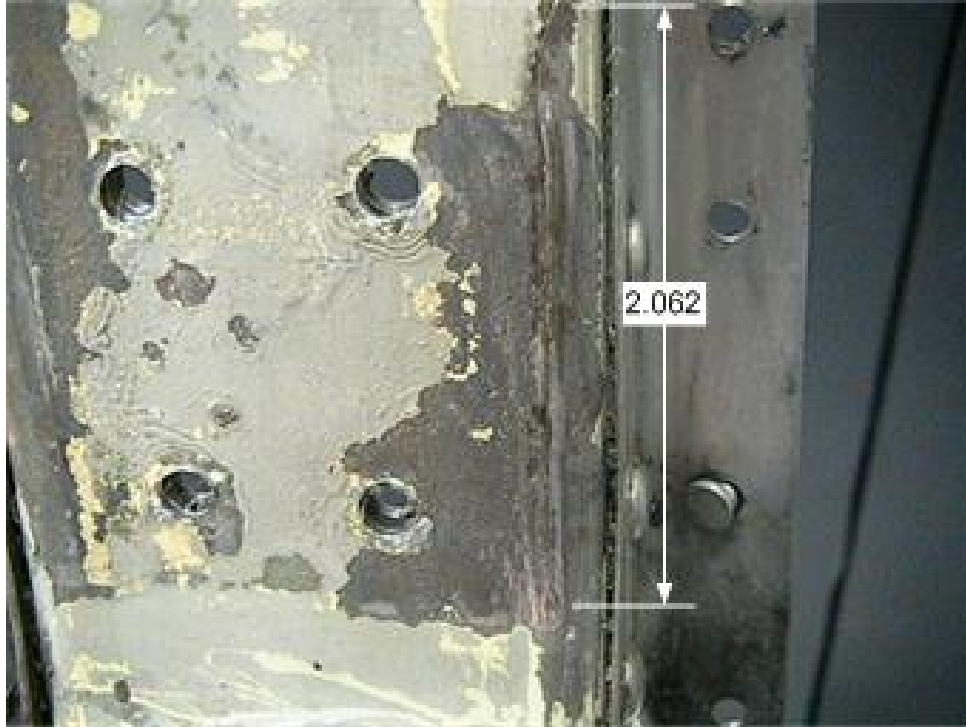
Cracked Cessna 402C Inboard Upper Surface of the Right Wing Outboard Engine Beam
